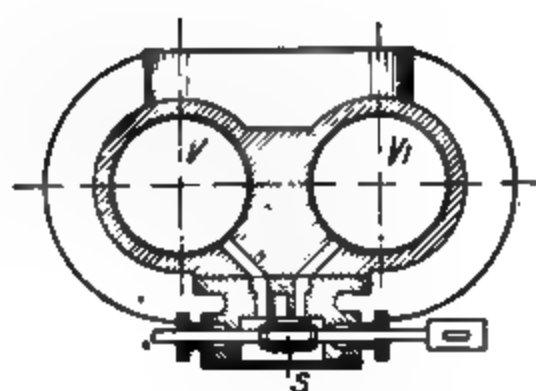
Details of Engine and Pump Valves for Hydraulic Mine Pump.
